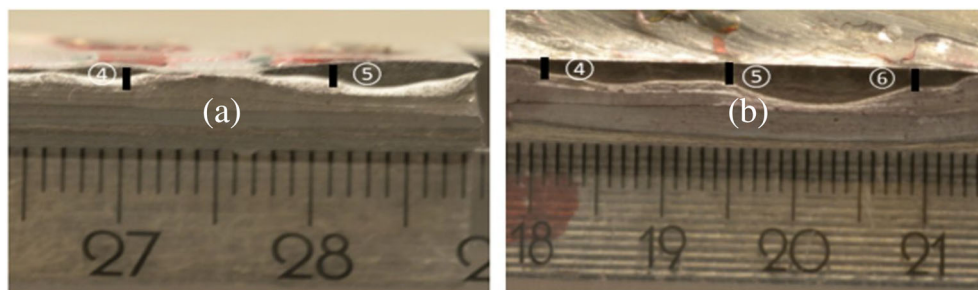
(a, b) Fracture surface of specimens corresponding to Figure 12
